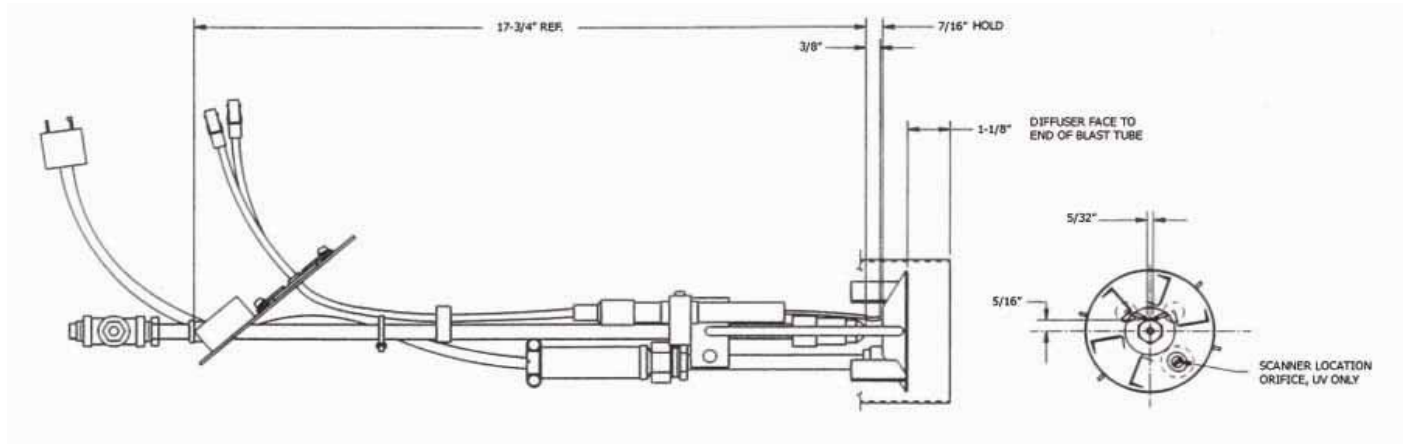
FPL 5 & 7 Drawer Assembly Direct Spark
